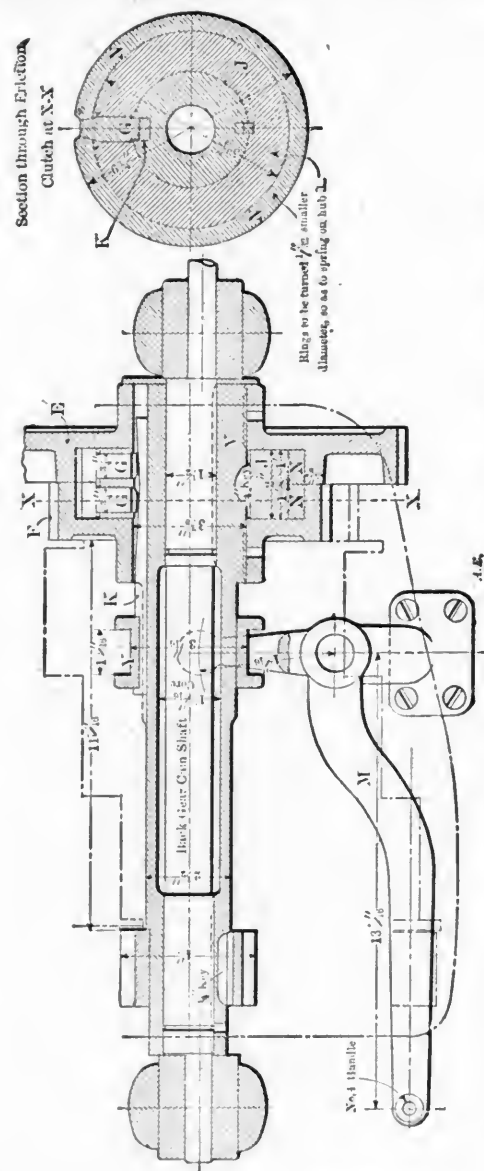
DETAILS OF THE FRICTION CLUTCHES FOR THE DOUBLE BACK-GEAR.
